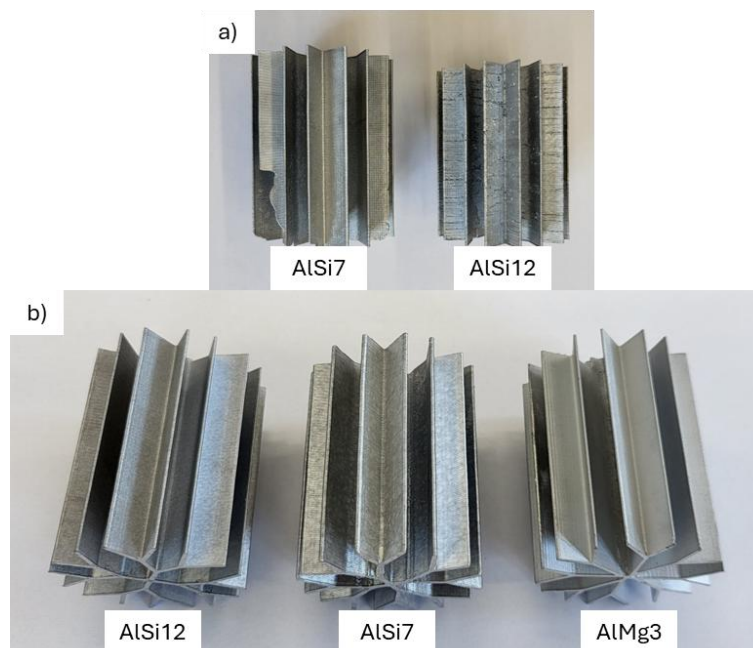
a) first defective inserts casting; b) correct, defect-free enhancers cast with elaborated parameters
